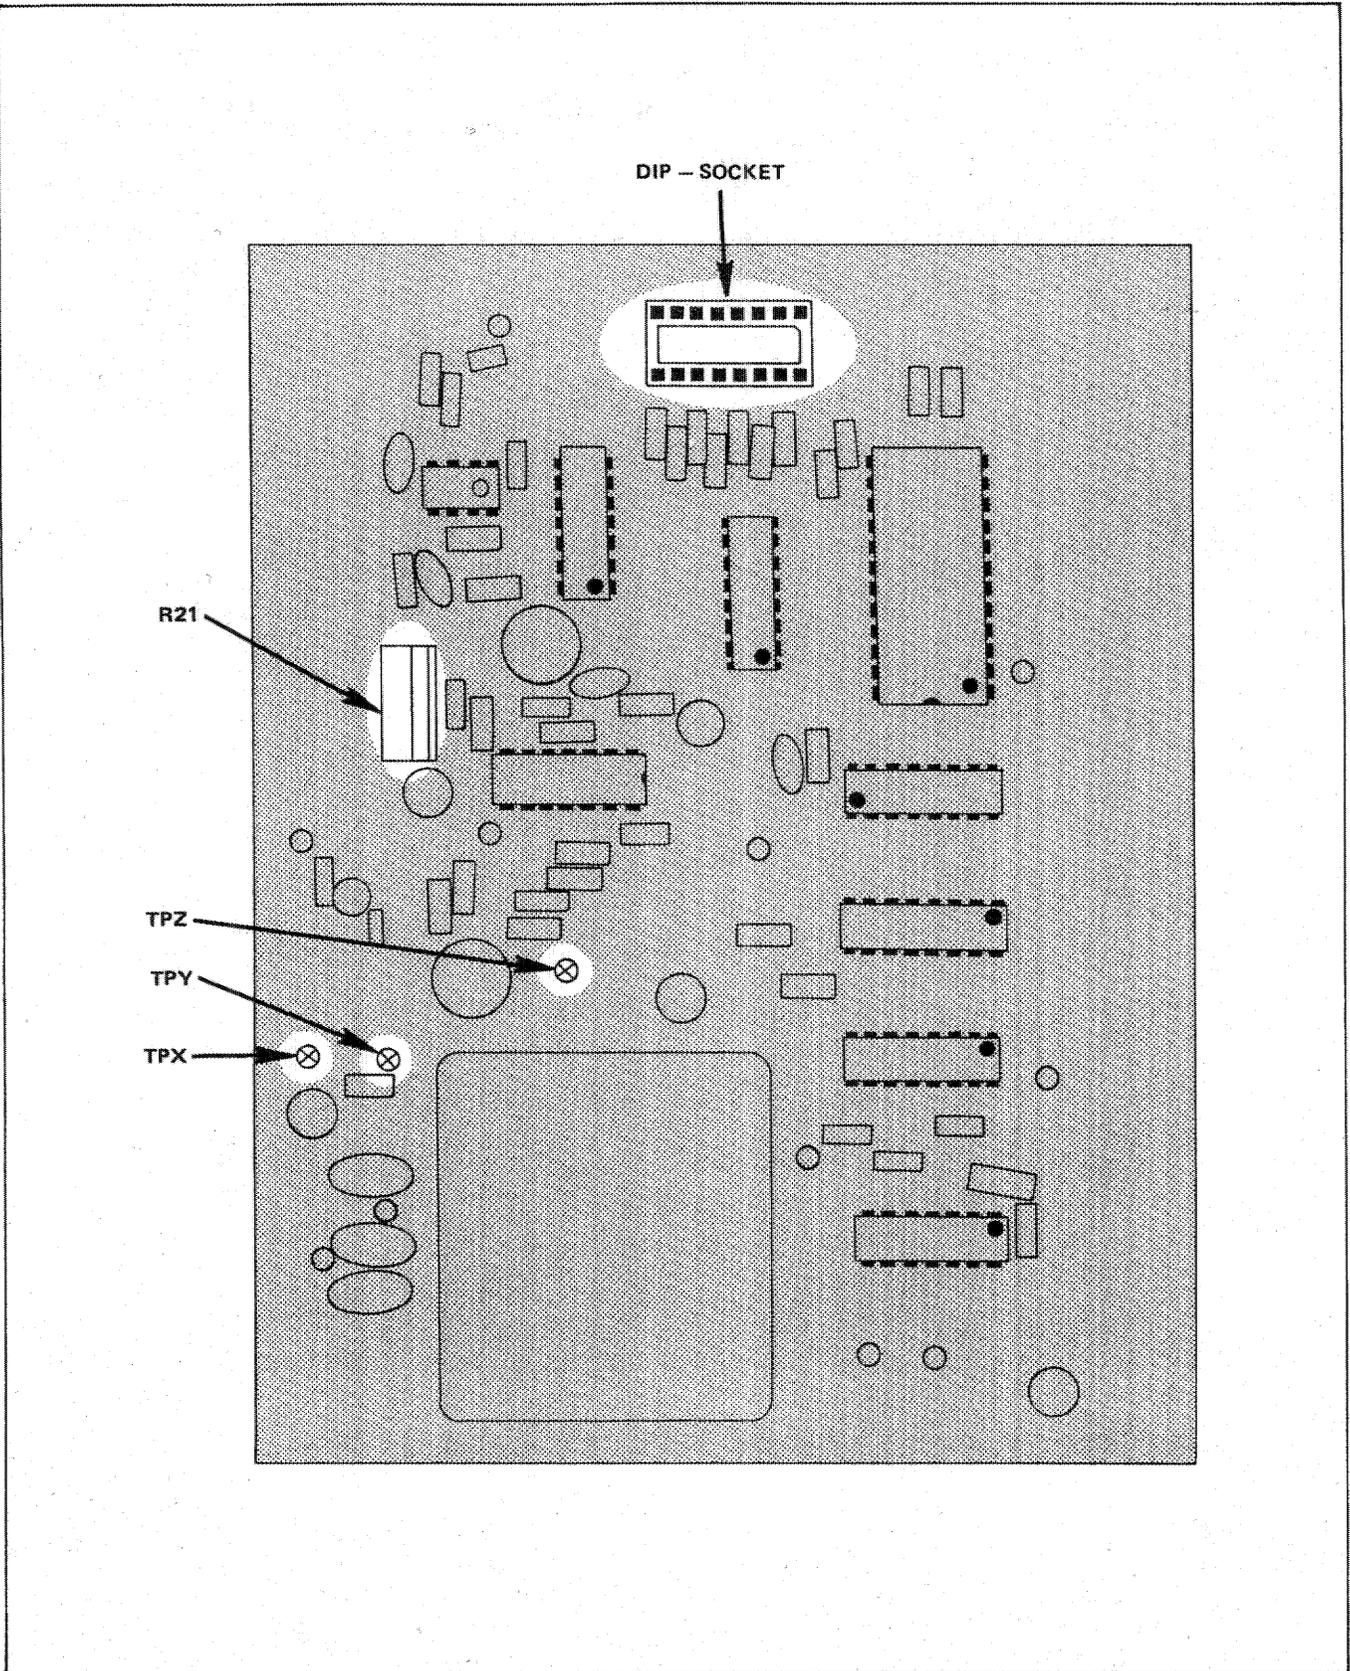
Card Assembly No. 25, Test Point and Adjustment Locations
